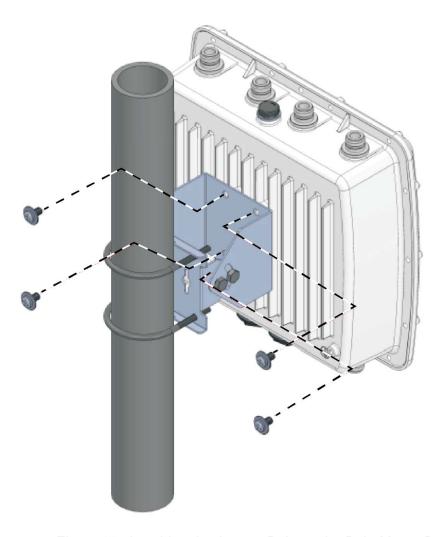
Attaching the Access Point to the Pole-Mount Brackets
